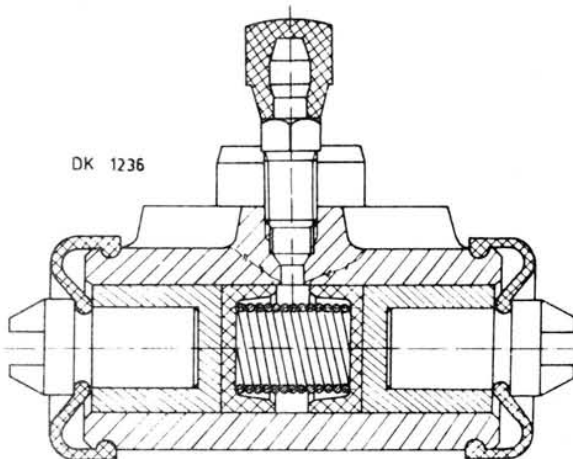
/1 - Sectional View of Wheel Cylinder
